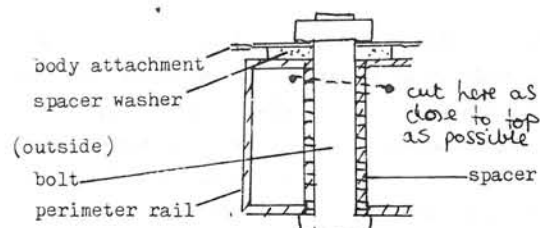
Section through perimeter rail at attachment to body (bolts C & M)
